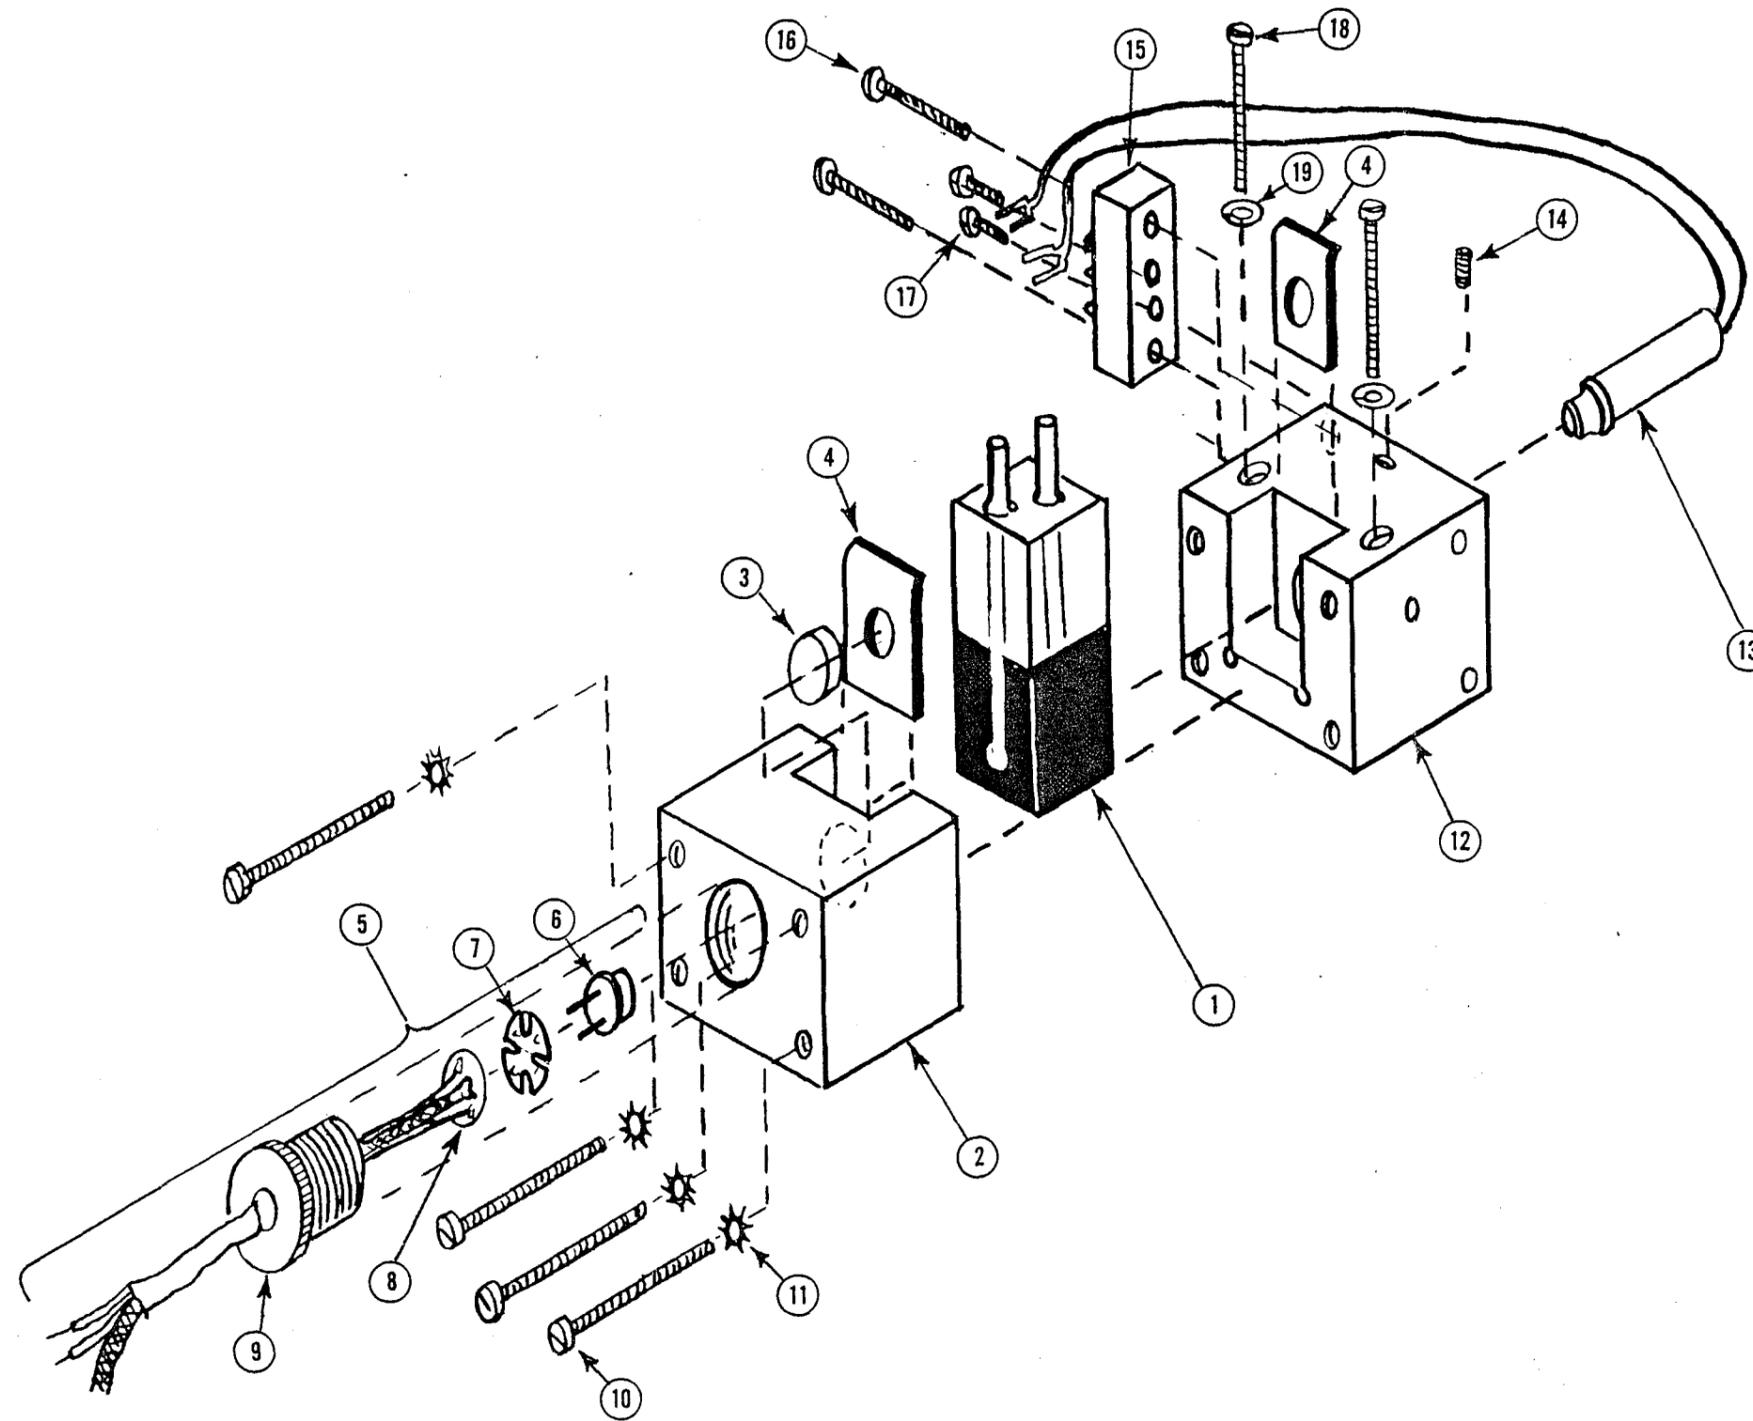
Hemoglobin Cell Assembly, Exploded View
